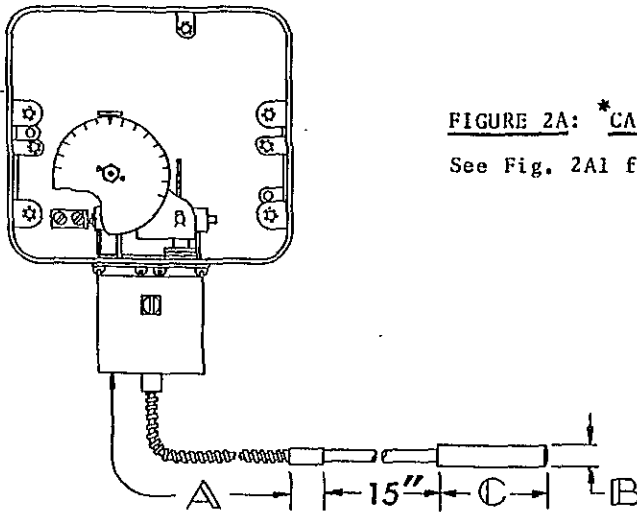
A: \*CASE & ELEMENT ASSEMBLY
